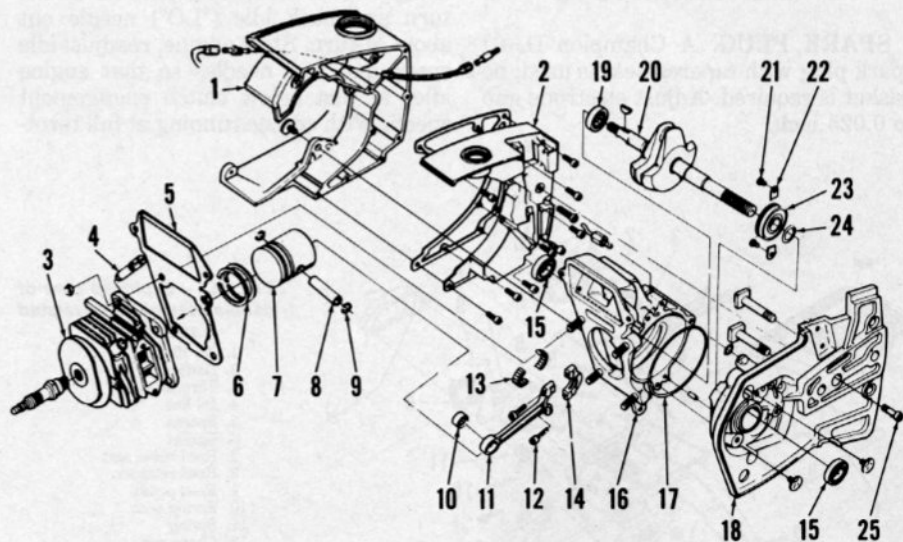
Exploded view of typical engine assembly. A head land piston ring is used on EZ Automatic model in place of rings (6) shown.
